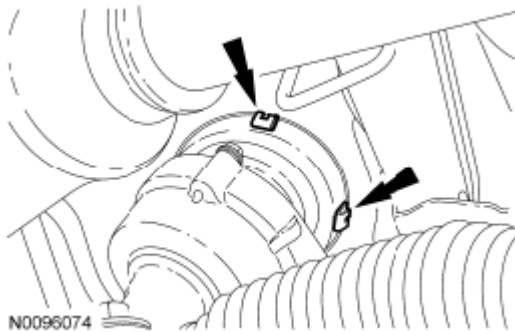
Locating Steering Gear-To-Dash Seal Clips
